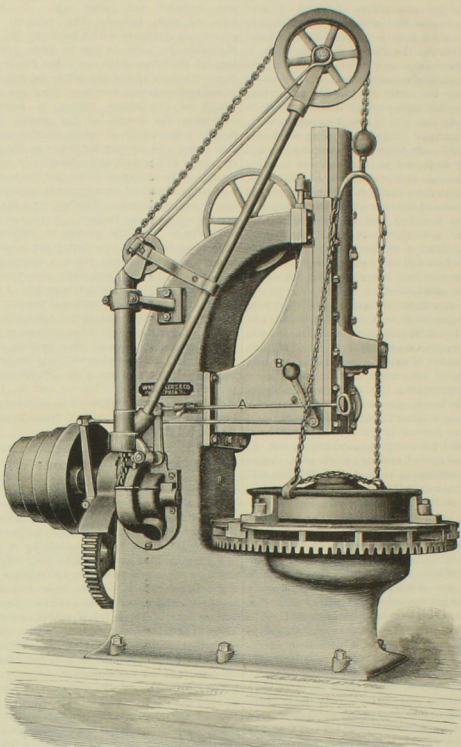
Wm. Sellers & Co.'s New Car Wheel Boring Mill.
